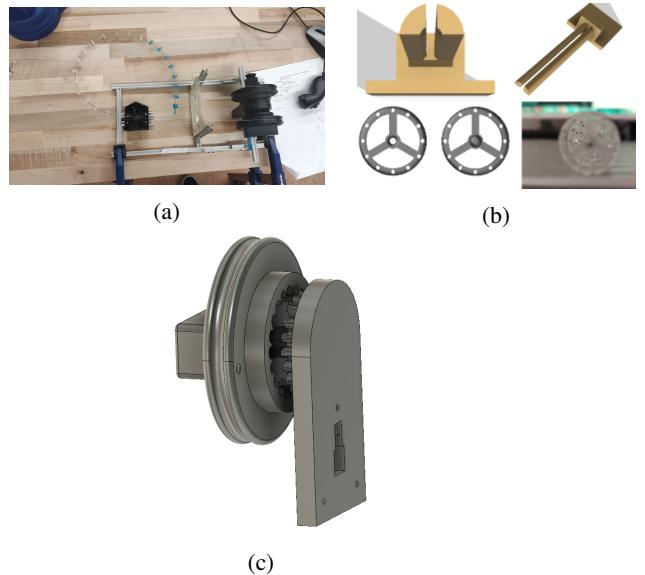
(a) Prototype: *Hamster2.5*, a hand-actuated navigation robot. The soft body is freeze by the locking mechanism. (b) Alignment Tool used to assist the assembling process. (c) Two locking mechanisms are used to freeze the soft body to a non-equilibrium position, which ease the measuring process.
